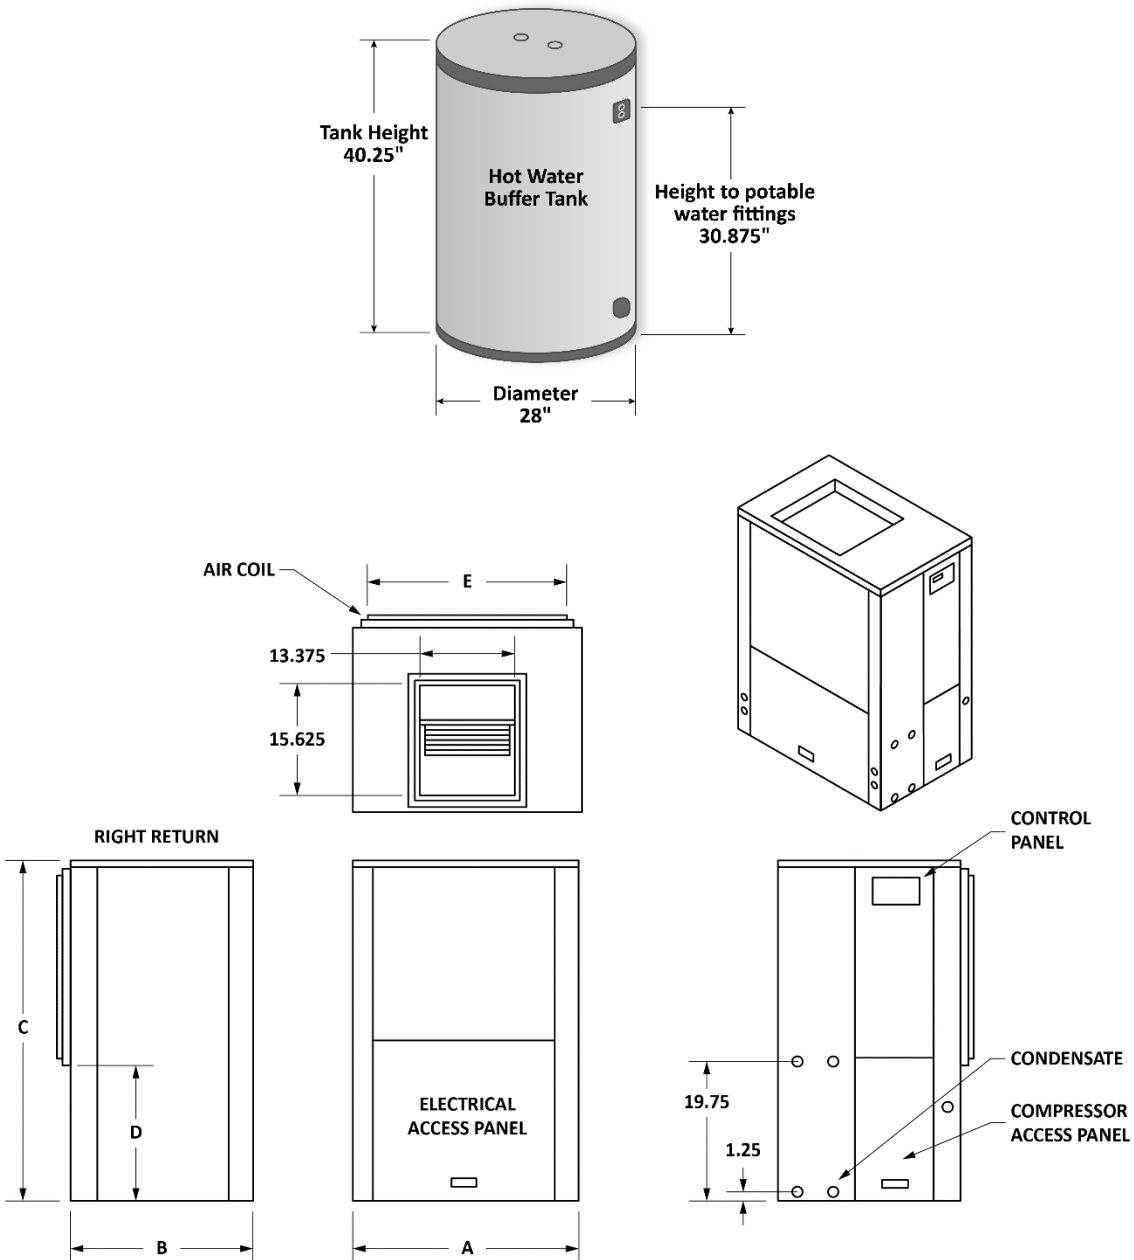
Hot Water Buffer Tank and DHHP unit specifications
